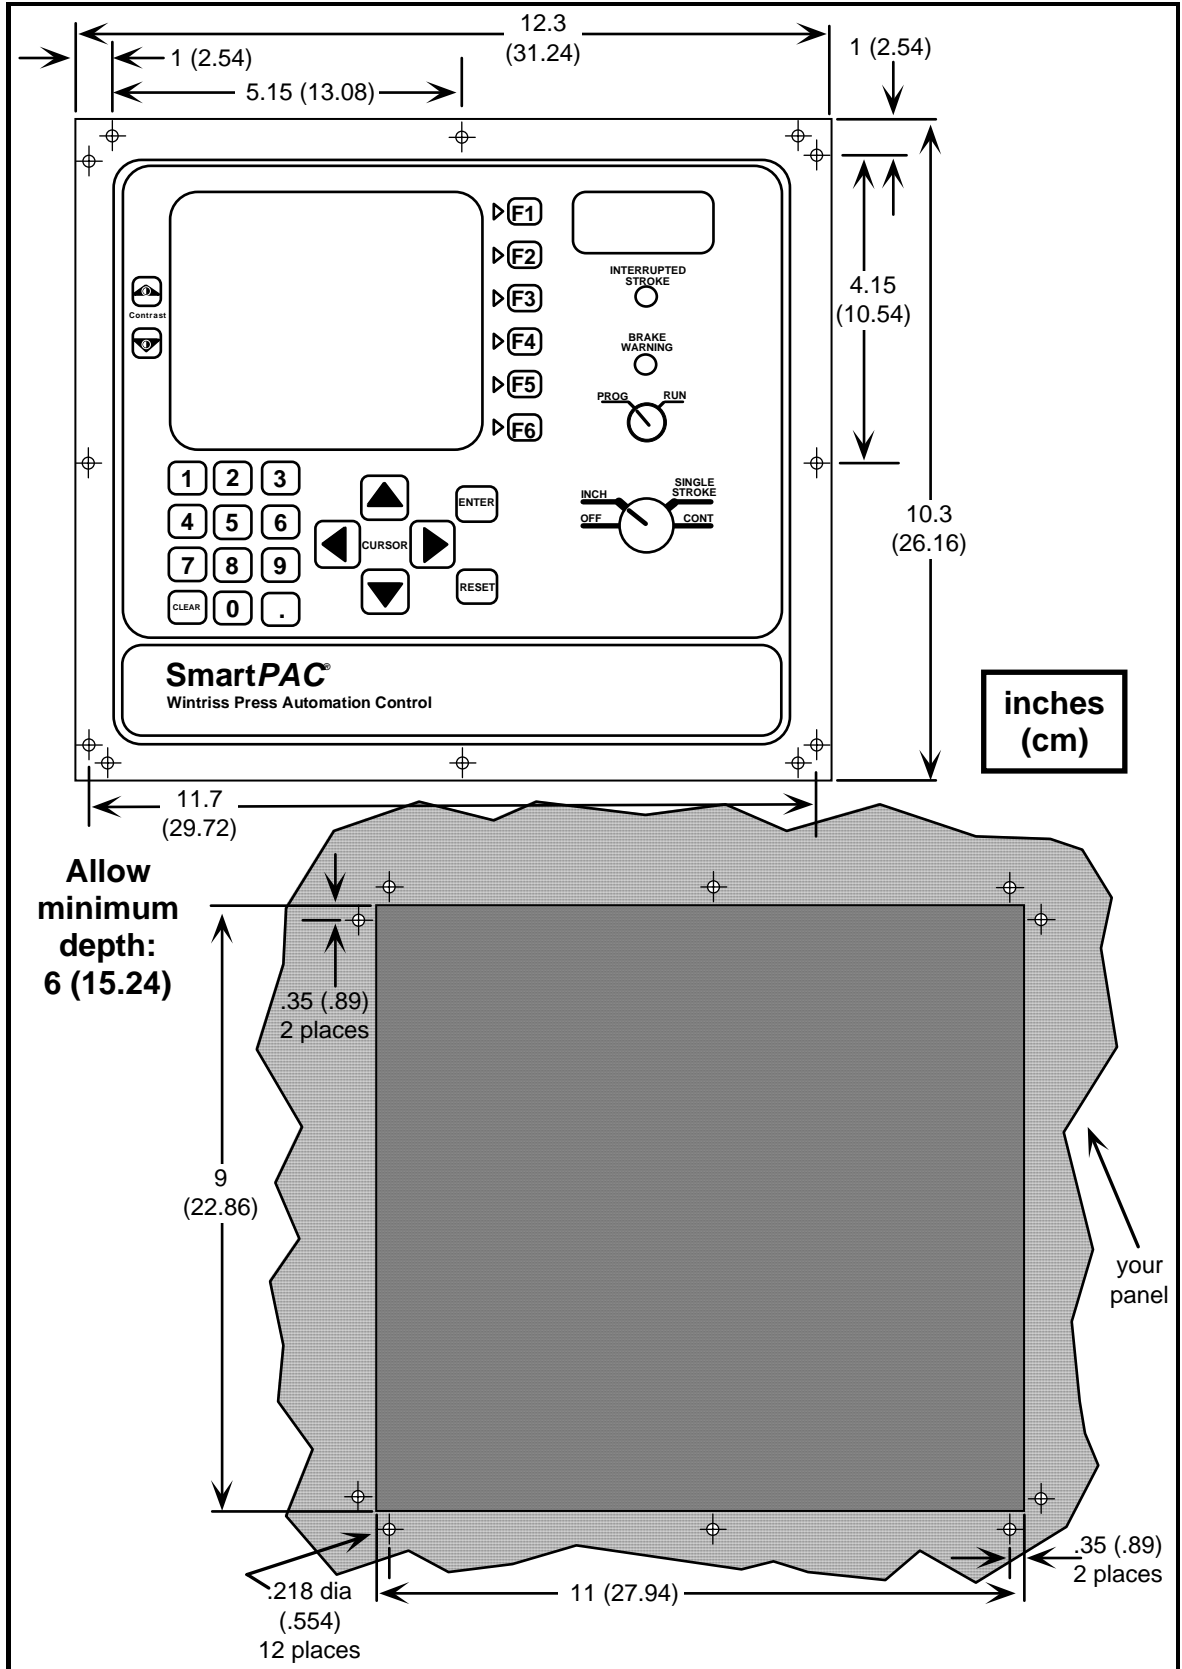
Mounting and cutout dimensions, SmartPAC panel mount
